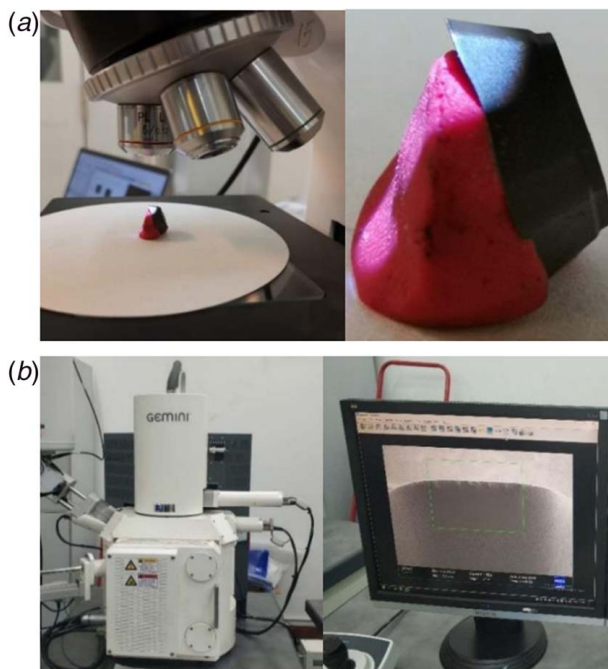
Experimental setup for tool wear measurement: (a) the optical microscope and (b) the FE-SEM system
